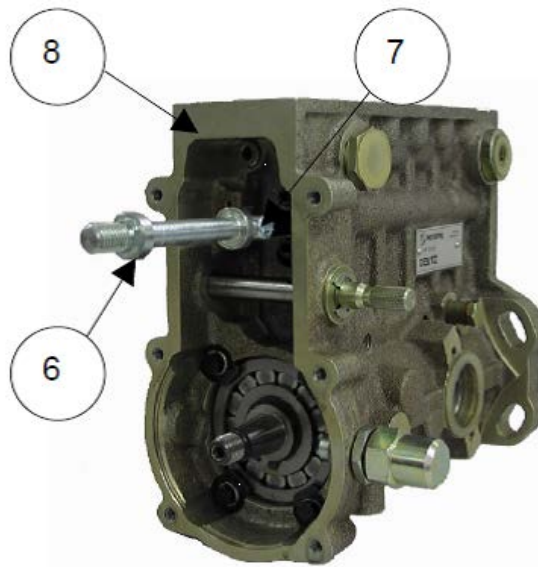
MOTORPAL PUMP W/OUT HOUSING OR MECHANICAL GOVERNOR
